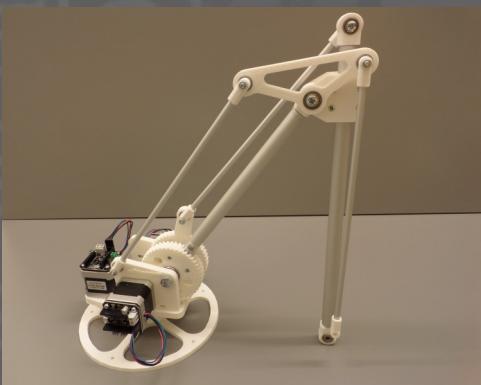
At this stage, your uStepper Robot Arm should look like this.
